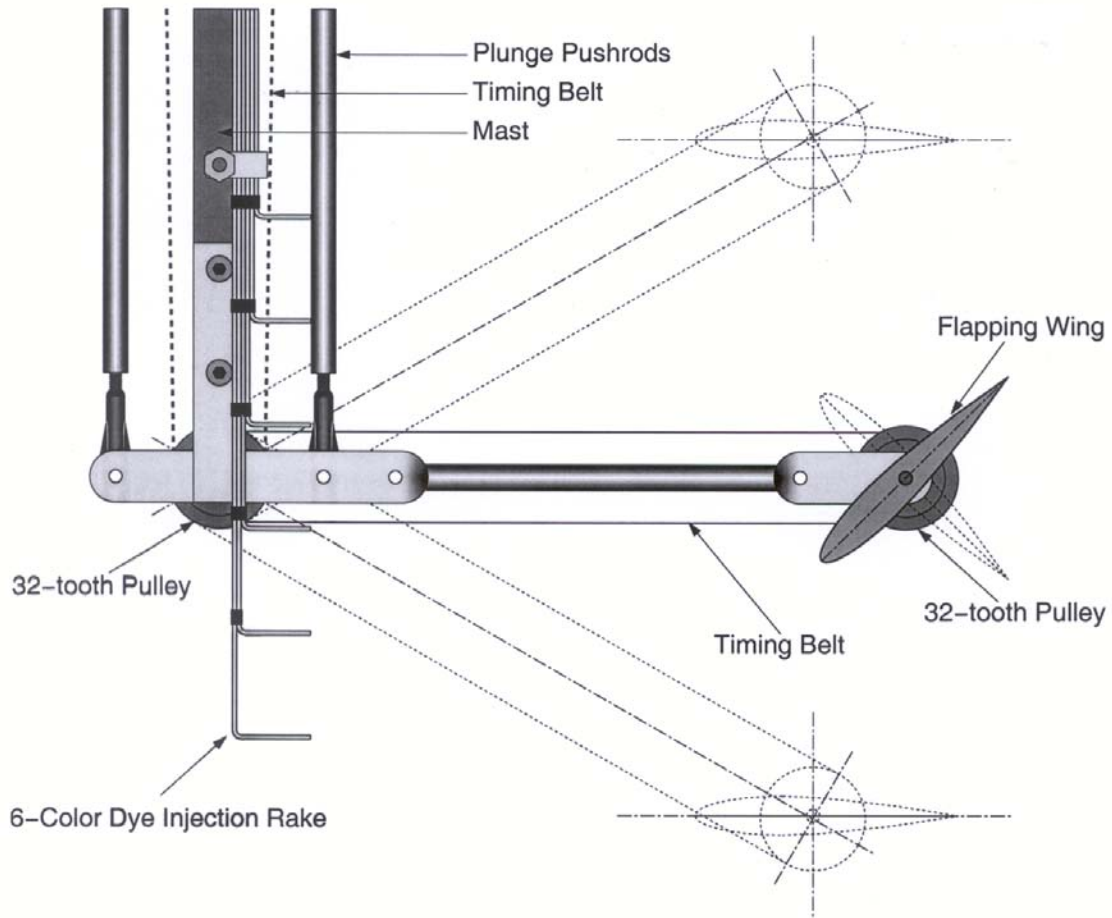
Close up view of Oscillating-wing Rocker Arm Assembly
